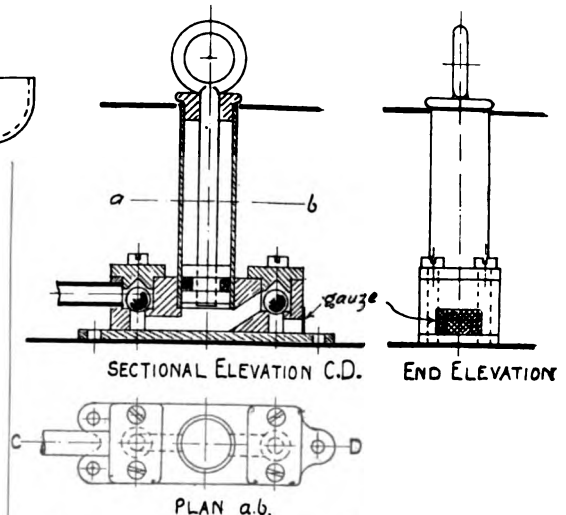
HAND-PUMP FOR FEEDING WATER TO BOILER. (Half full size.)
